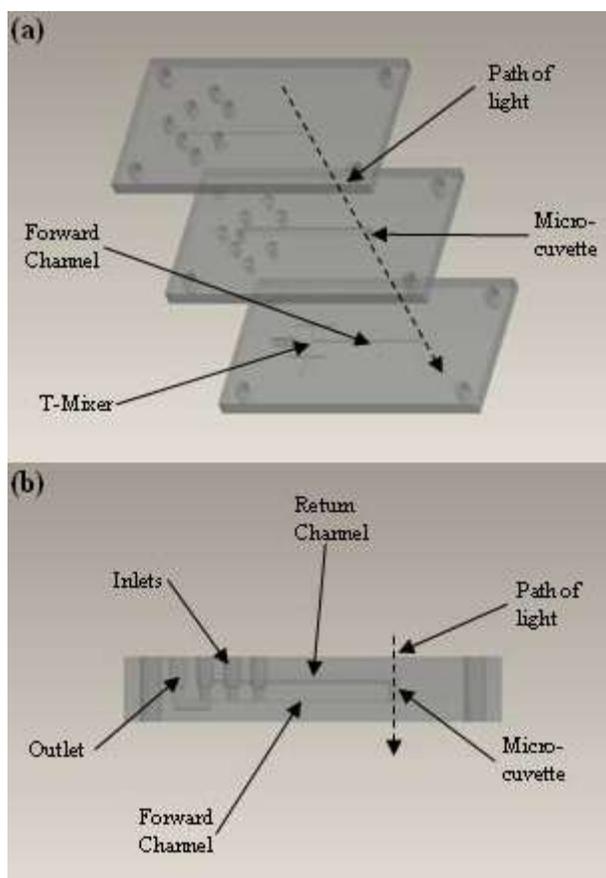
(a) Exploded view of the microfluidic chip. (b) Side view of fully assembled chip showing the micro-cuvette.
